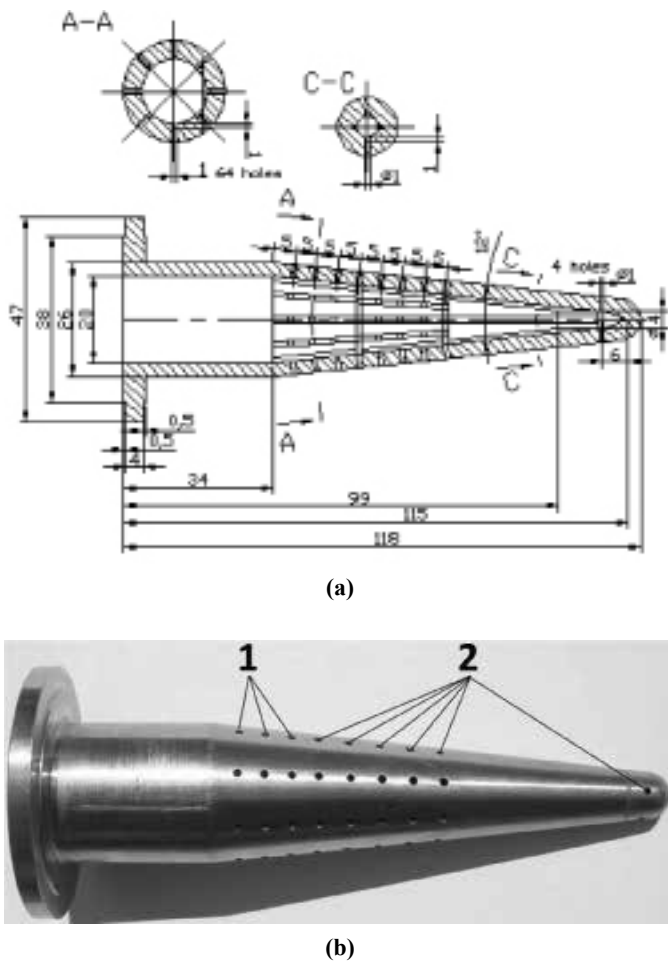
The gasification chamber. Key: (a) drawing dimensioned in millimetres; (b) overview; 1. fuel holes; 2. oxidizer holes.
